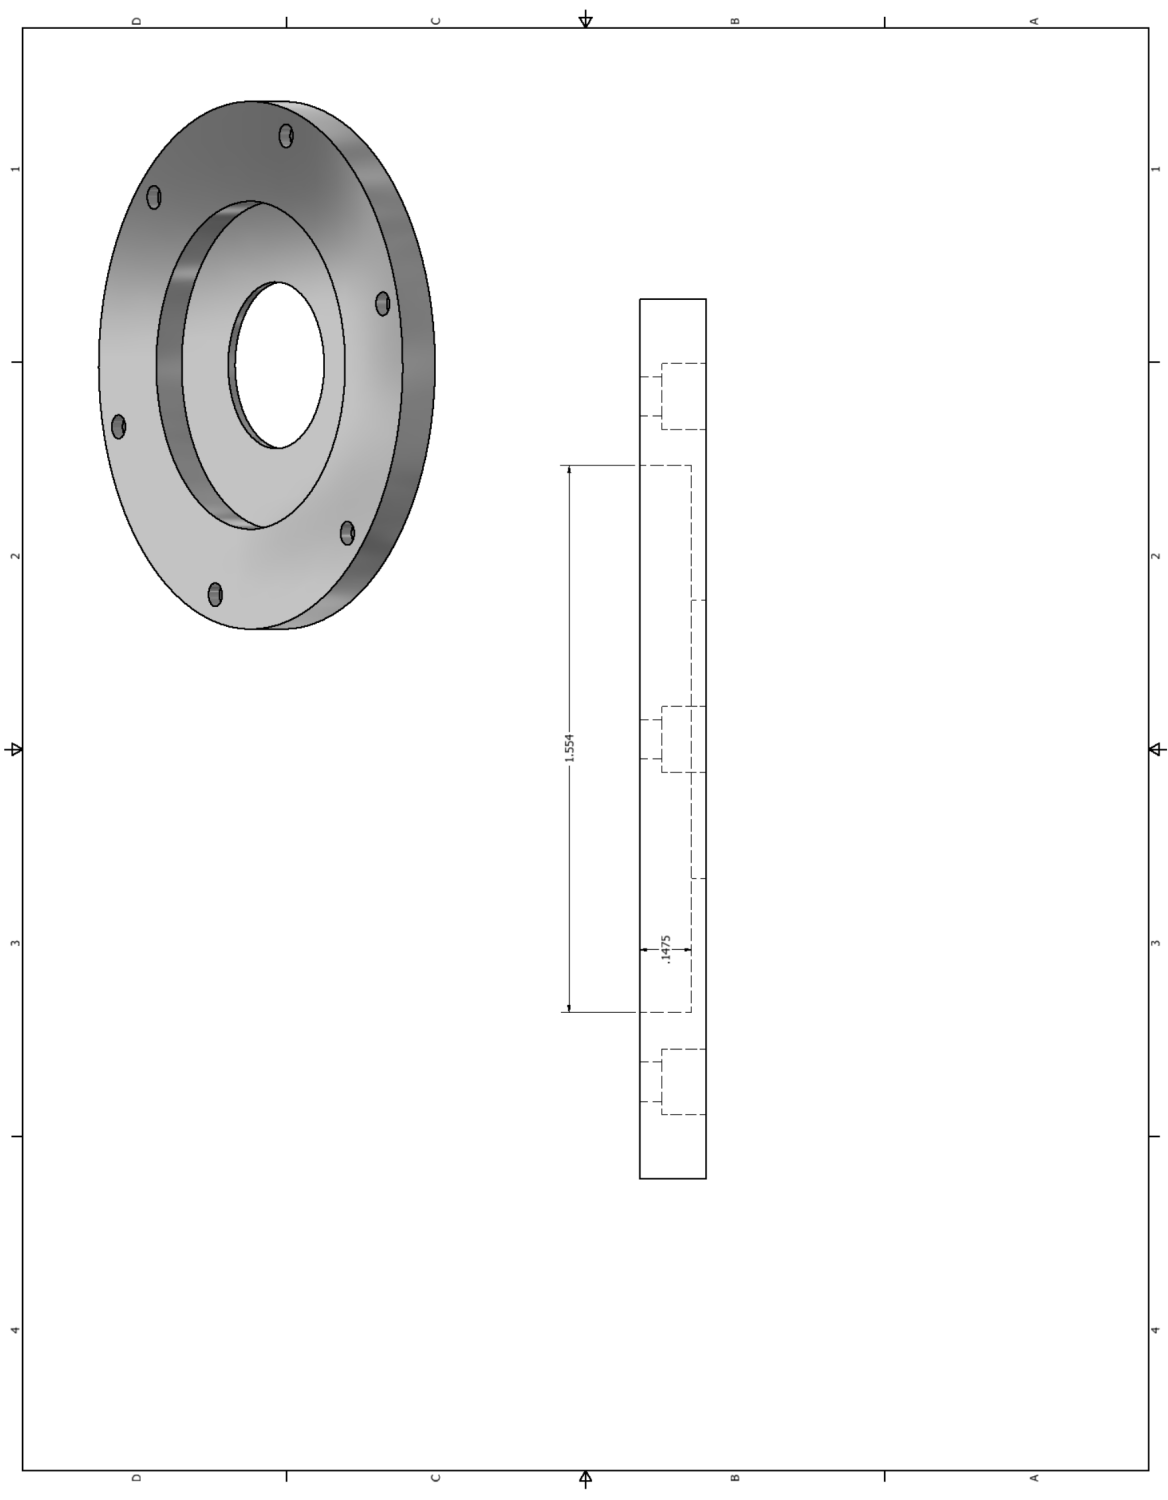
Engineering drawing: Valve end modification to be made to the welded extension/initial end (figures B.5
